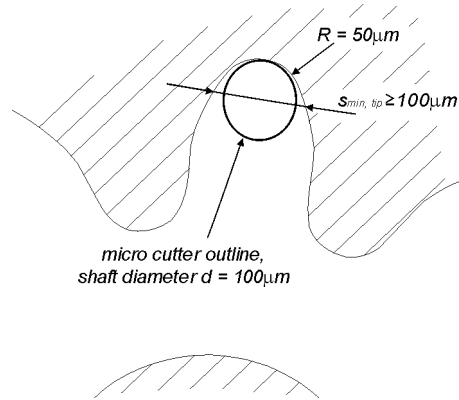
Gear tooth layout of the planet gear corresponding to micro specific design rules
